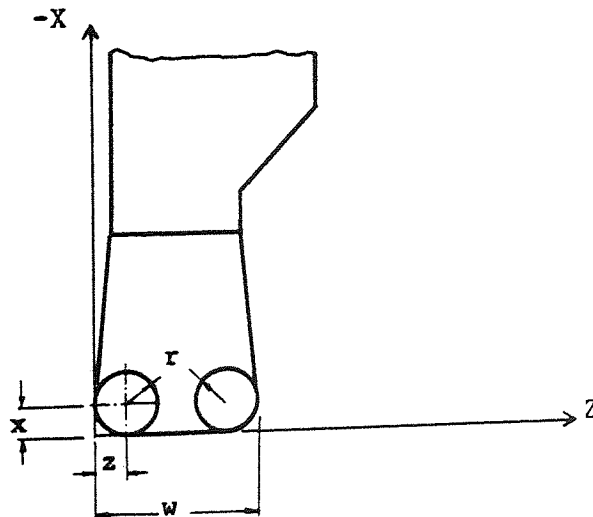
TOOL COORDINATE SYSTEM FOR PARTING-OFF TOOL
